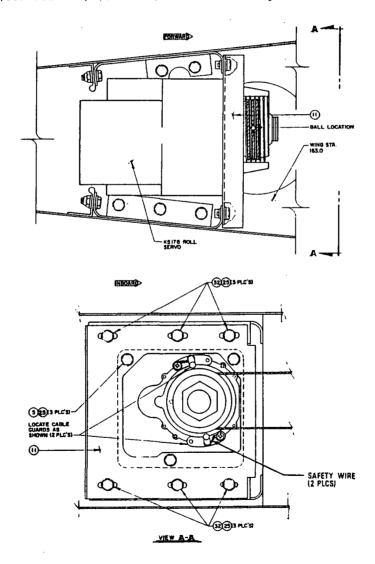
B ROLL MOUNT AND CABLE WRAP
